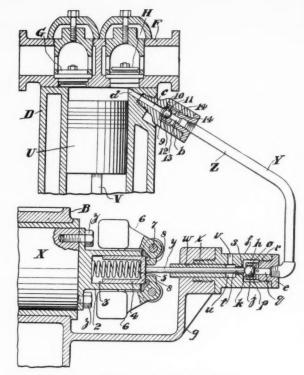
Spring pressure is employed to overcome force of weights to keep valve open to atmosphere
